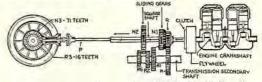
Direct or high gear. Note that the drive is direct from the engine crank shaft to the drive pinion (R3), to the driven ring gear (N3). Gears (R) and (N) are meshed at all times.
